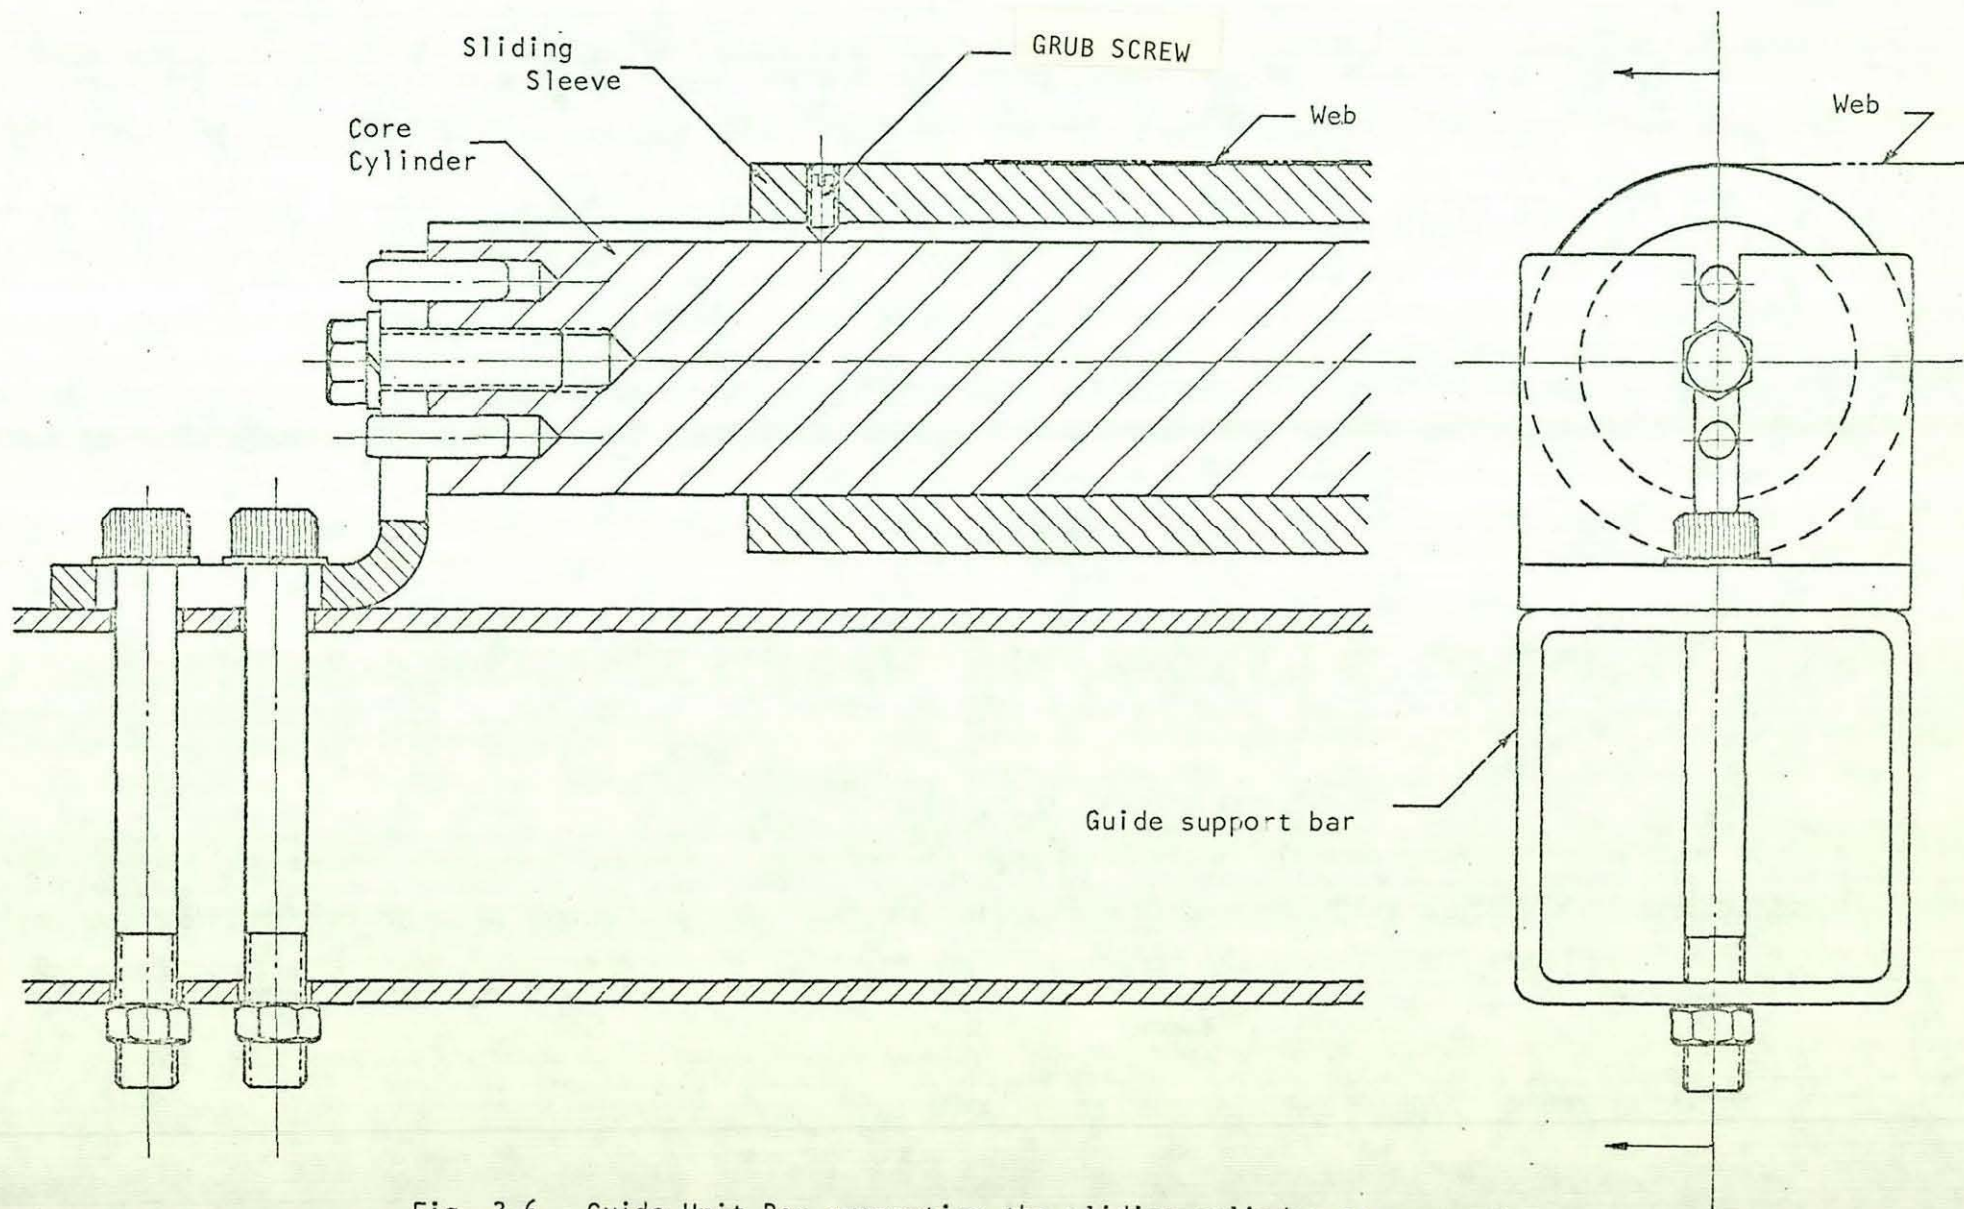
Guide Unit Bar supporting the sliding cylinder arrangement
